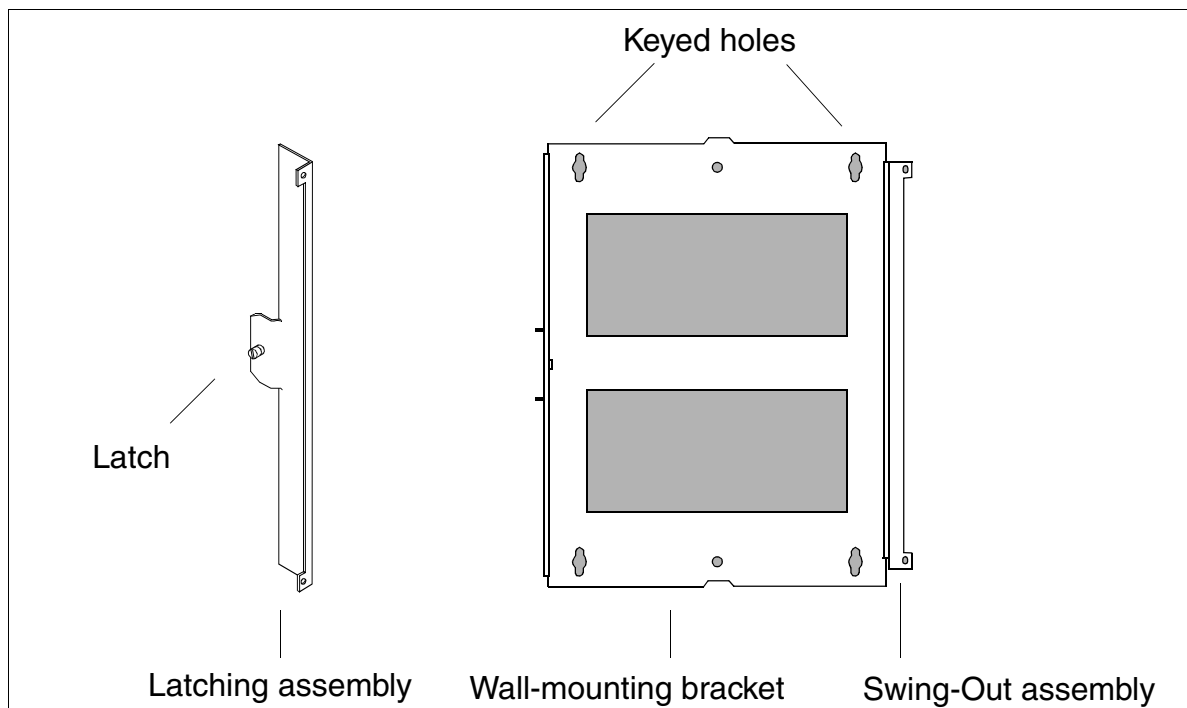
HiPath 3750 Wall-Mount Kit (for U.S. Only)
